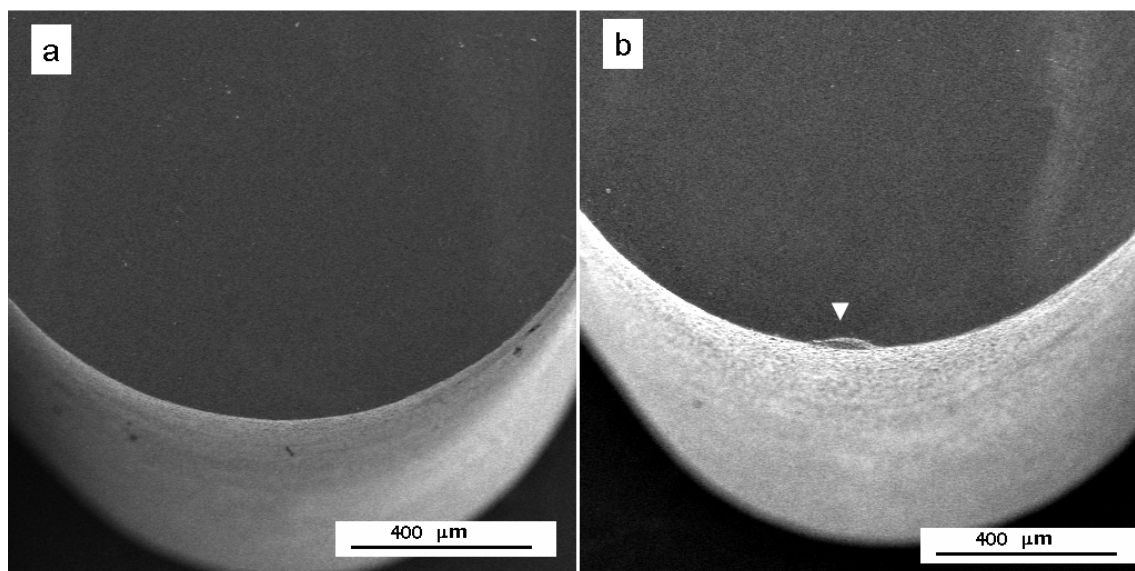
Image (SEM) of uncoated tool cutting edge, (a) before and (b) after machining tests.
